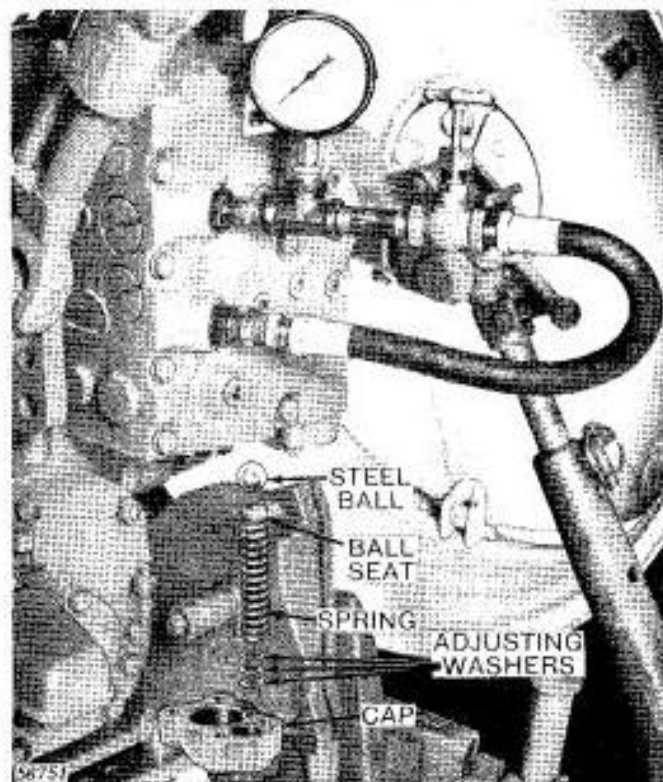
Checking Relief Valve Pressure in No. 2 Circuit of Dual Valve Housing; Location of Adjusting Washers
